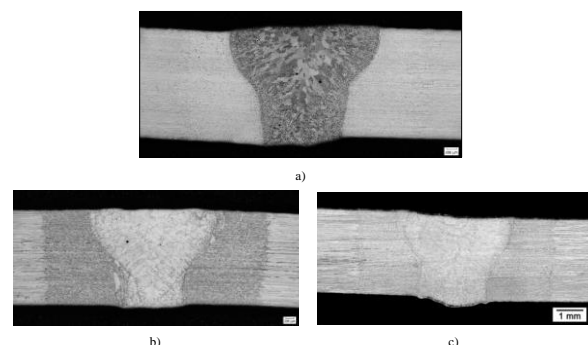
Macrostructure images of welded joints: a) without HT; b) 150°C/24h; c) 180°C/24h
